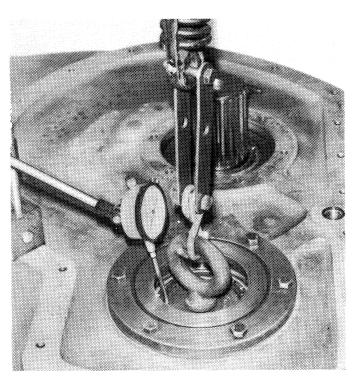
Applying Forward Thrust to Reverse Shaft.
